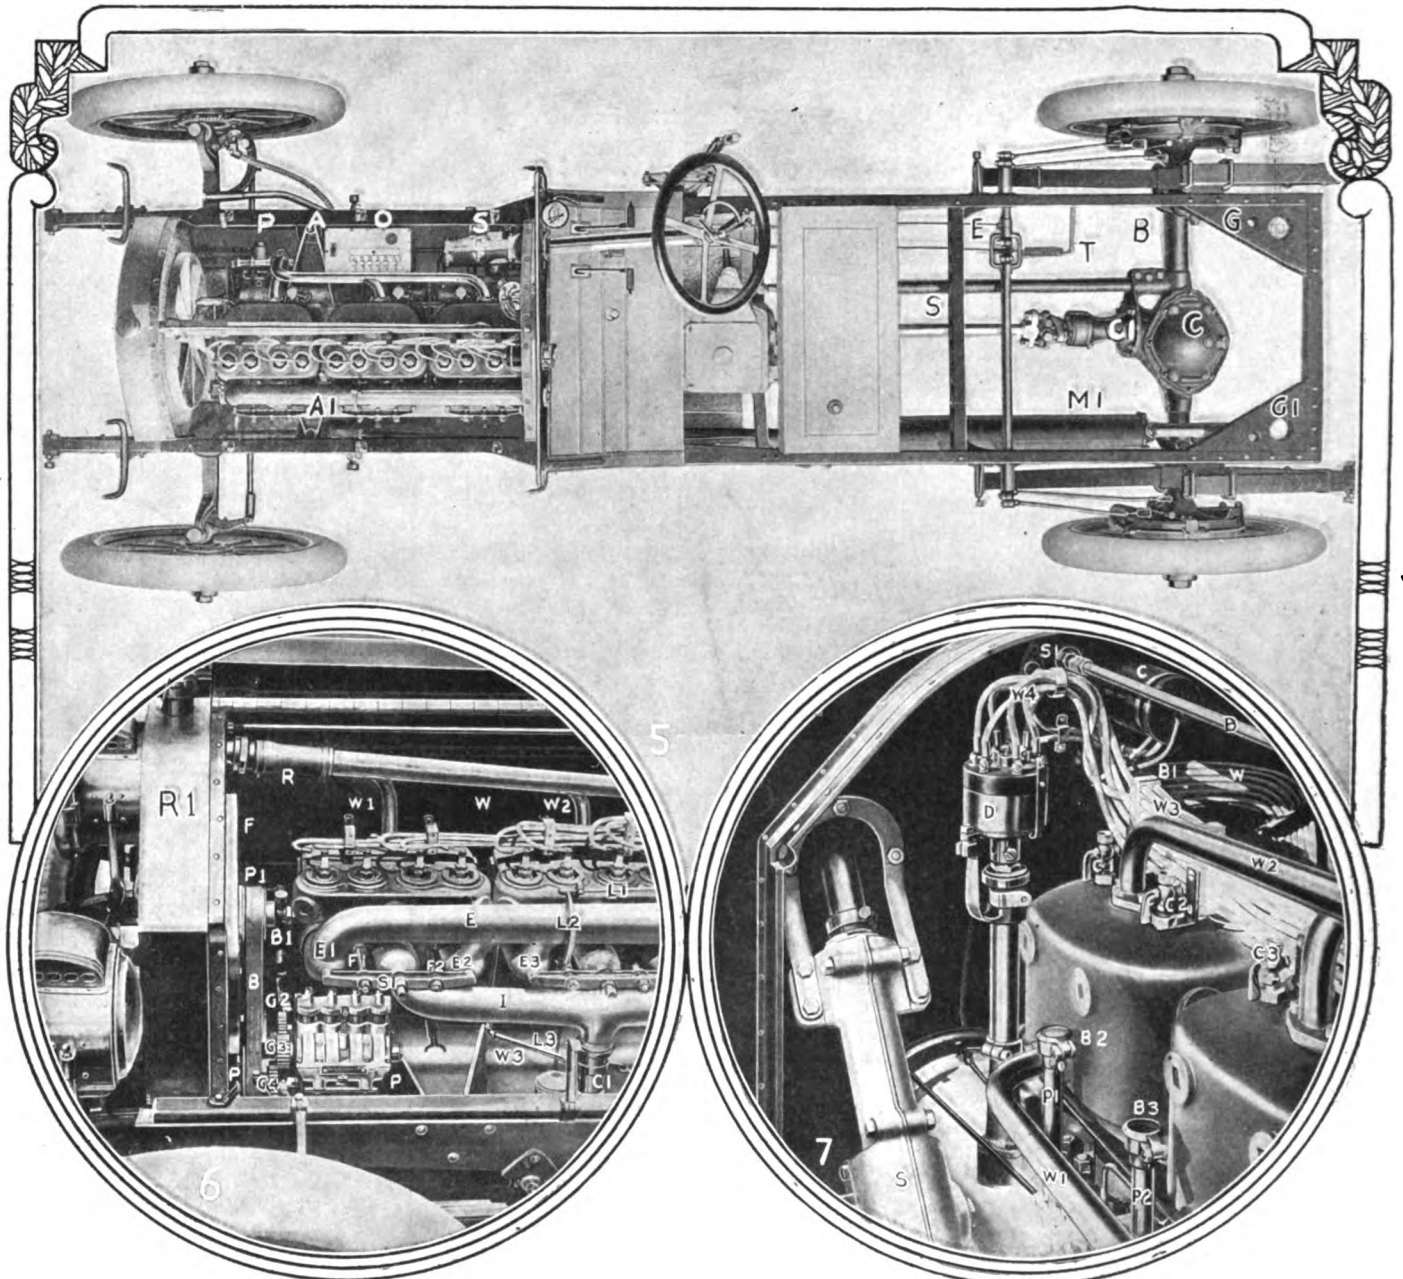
Plan view of the model AA chassis showing the six-cylinder motor and the live rear axle. Fig. 6—Front end of the motor showing tire inflation pump. Fig. 7—Right-hand side of motor showing distributor and coil on the dash
